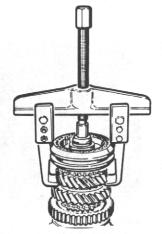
Using a two-legged puller to remove the 3rd gear and 3rd/4th gear synchroniser unit from the mainshaft (Sec 7)
